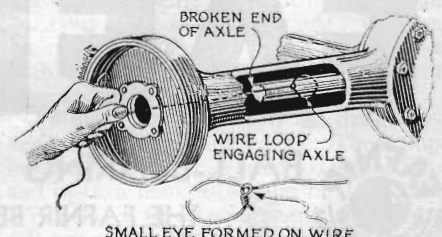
A loop in a piece of stiff wire used to remove broken axle without disturbing cover.
